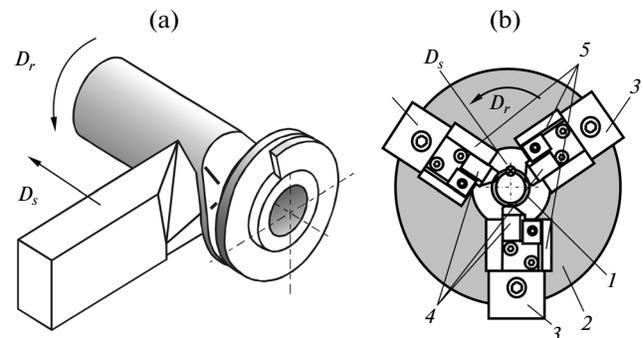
Deformation and cutting process (a) and three-tool cutting assembly based on an automatic lathe chuck (b): (1) pipe blank; (2) automatic chuck; (3) jaws; (4) deformational and cutting inserts; (5) tool holder; D_r , primary cutting motion; D_s , feed motion.
